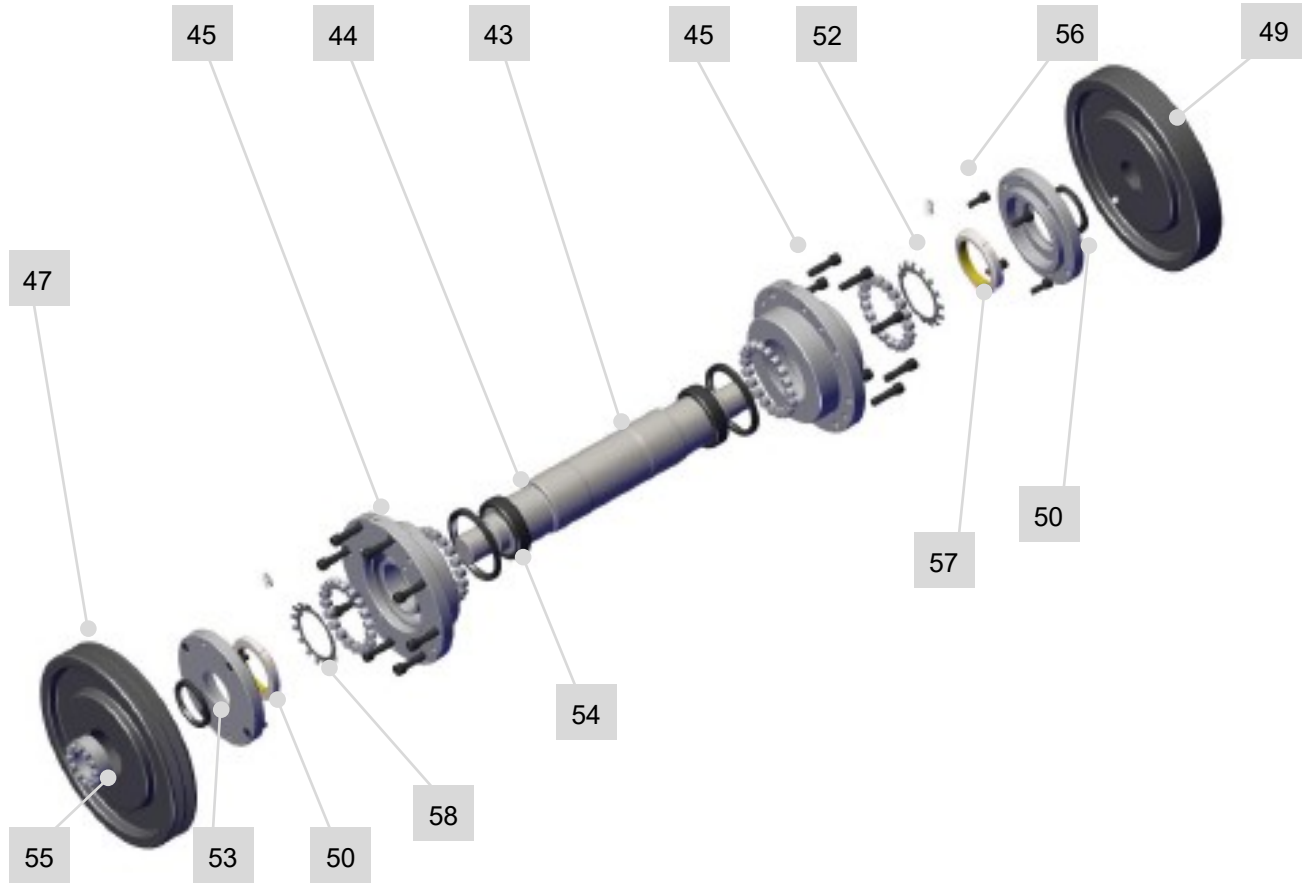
Parts of the LMFC 250 crank arm shaft assembly.
